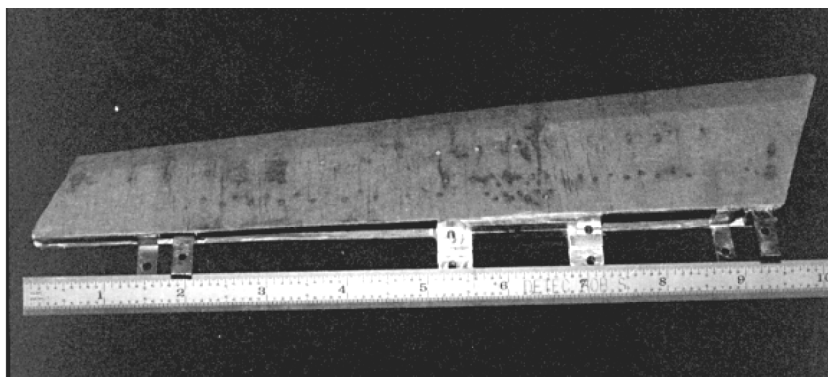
Leading edge flap design showing actuator and flexure hinges.
